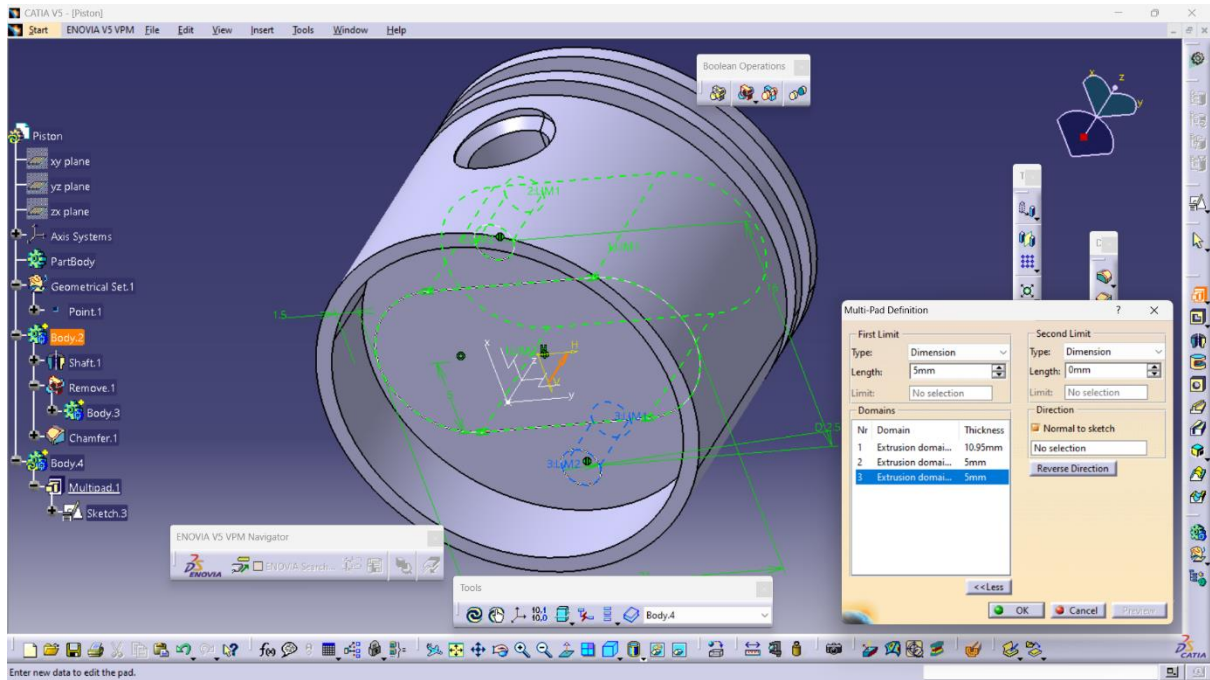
Creating solid "Body4" of Sketch3 using Multi-Pad definition
